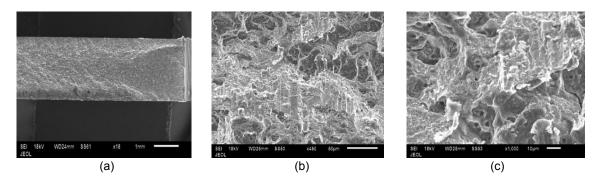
SEM pictures of fractured specimen (a) Initial crack region; (b) Facets; (c) Voids
